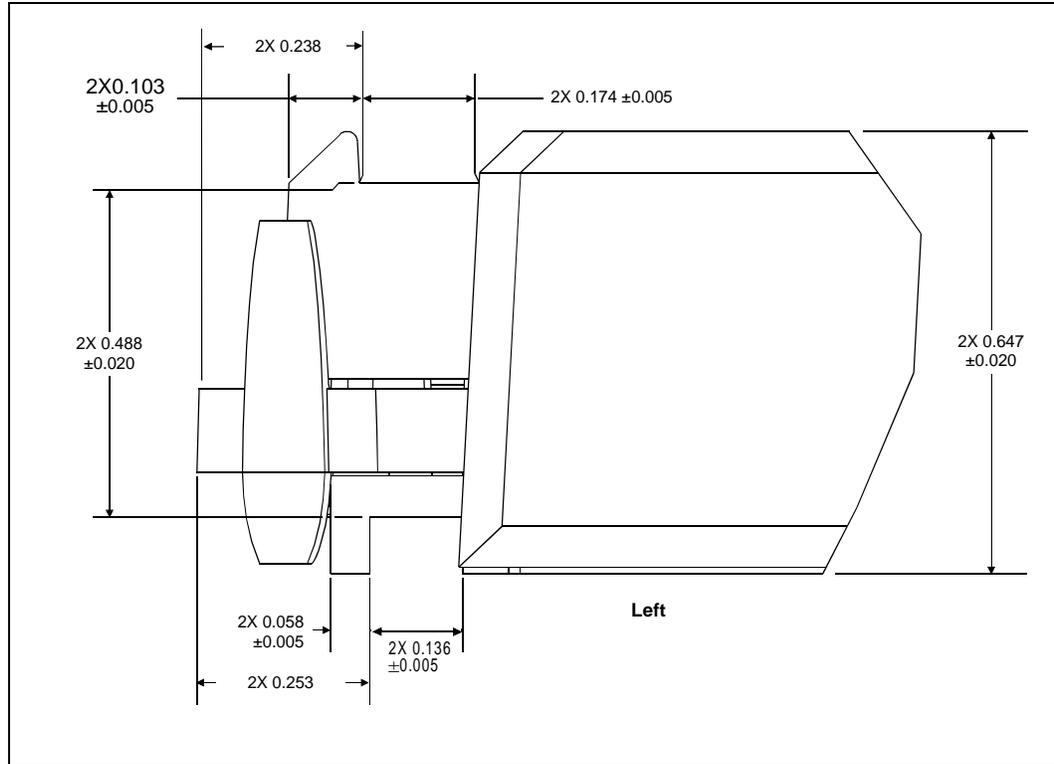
S.E.C.C. Packaged Processor — Latch Arm, Extended Thermal Plate, and Cover Detail Dimensions (Reference Dimensions Only)
